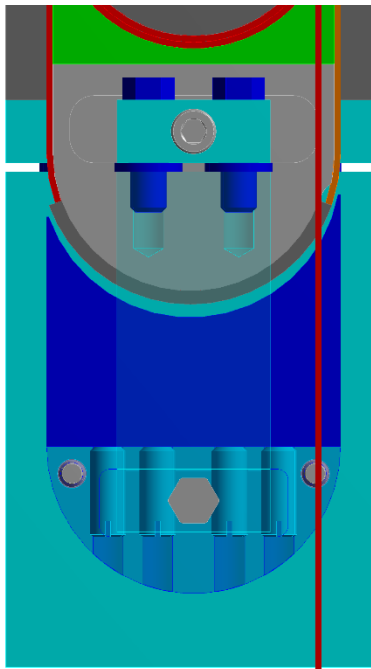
Clamp#2 before the pressing bolts are tightened.
